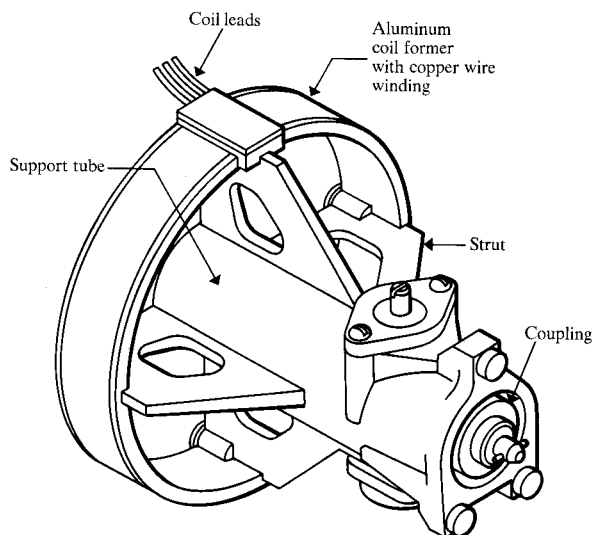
Moving-coil actuator assembly, showing support tube, coil former, and struts.
